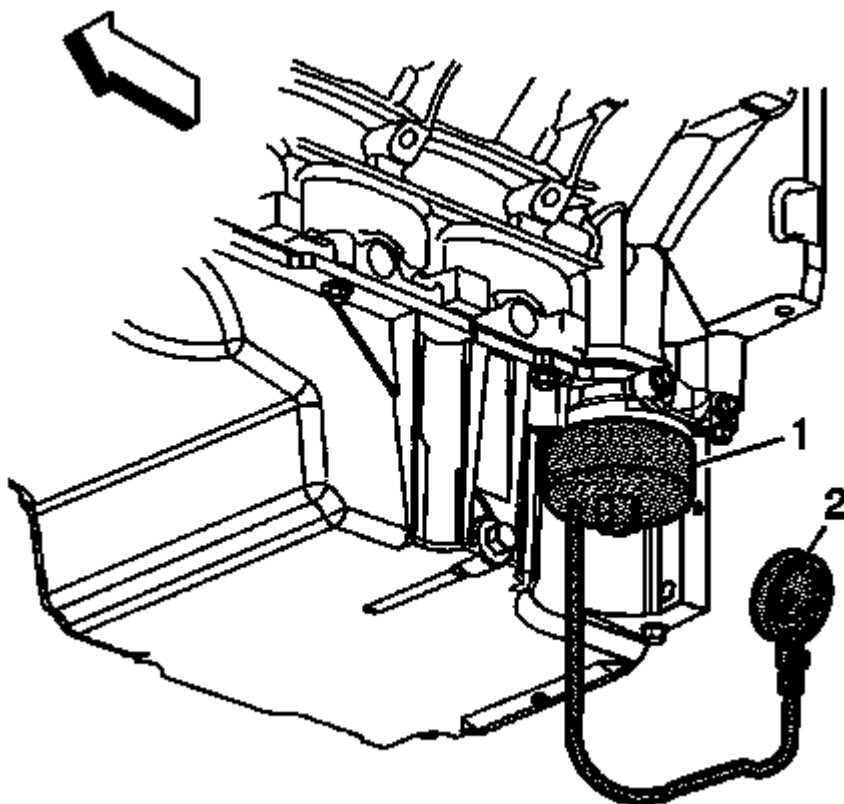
Using Special Tools EN-47971 & J 21867 To Check Oil Pressure
